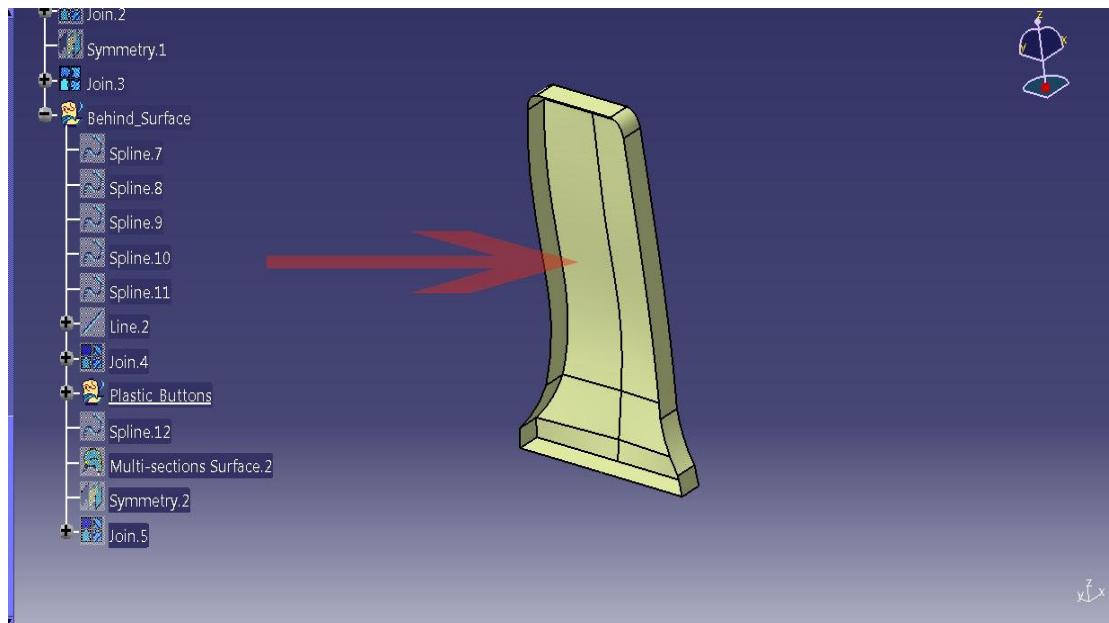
Creation of throttle's pedal pad multi section surface.
